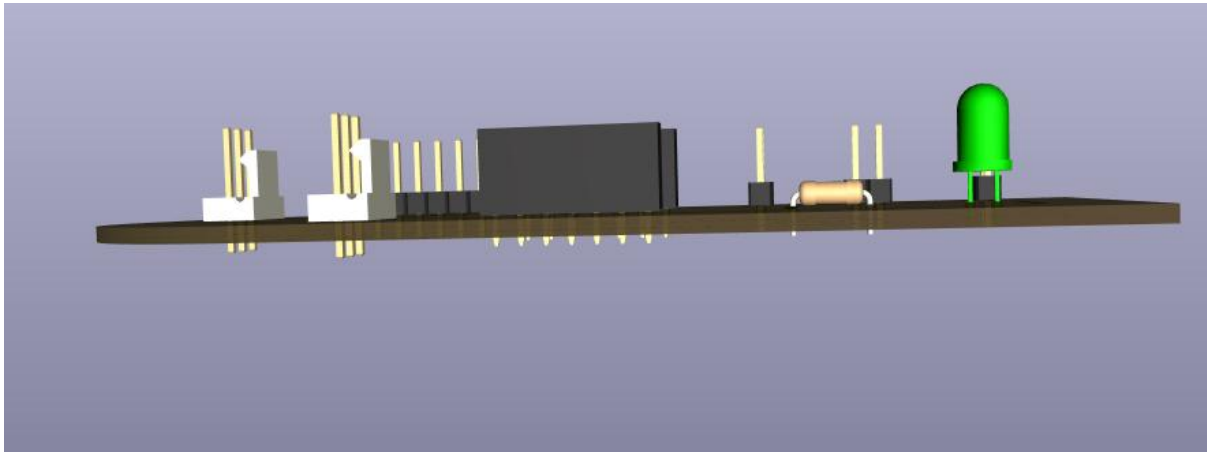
PCB In 3d Front View In Kicad PCB Editor
